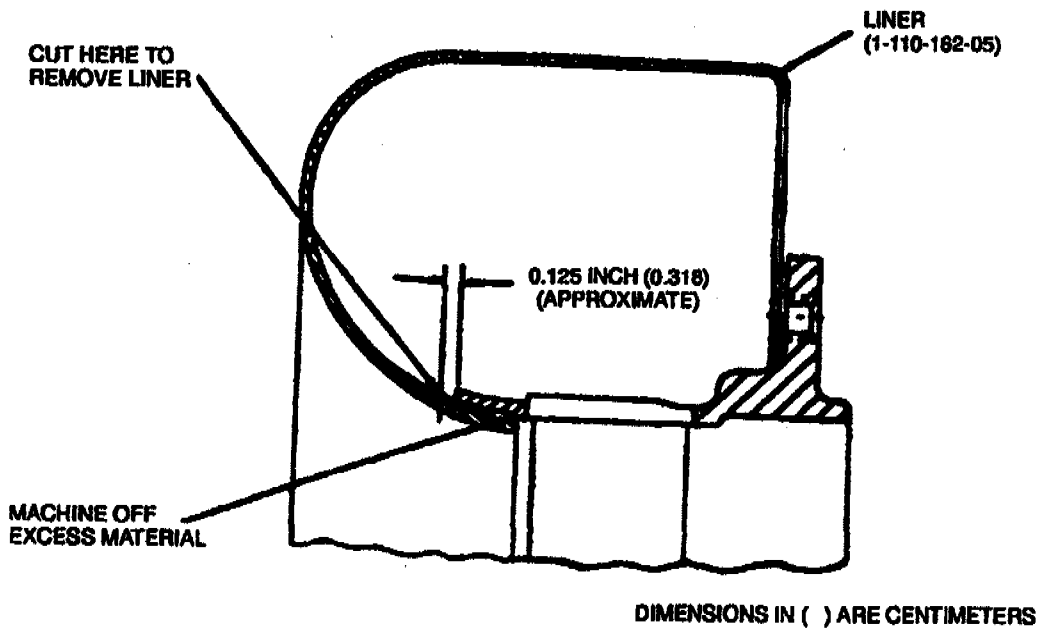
Removal of Liner (T53-L-13B, -15, -701, -701A, -703).
